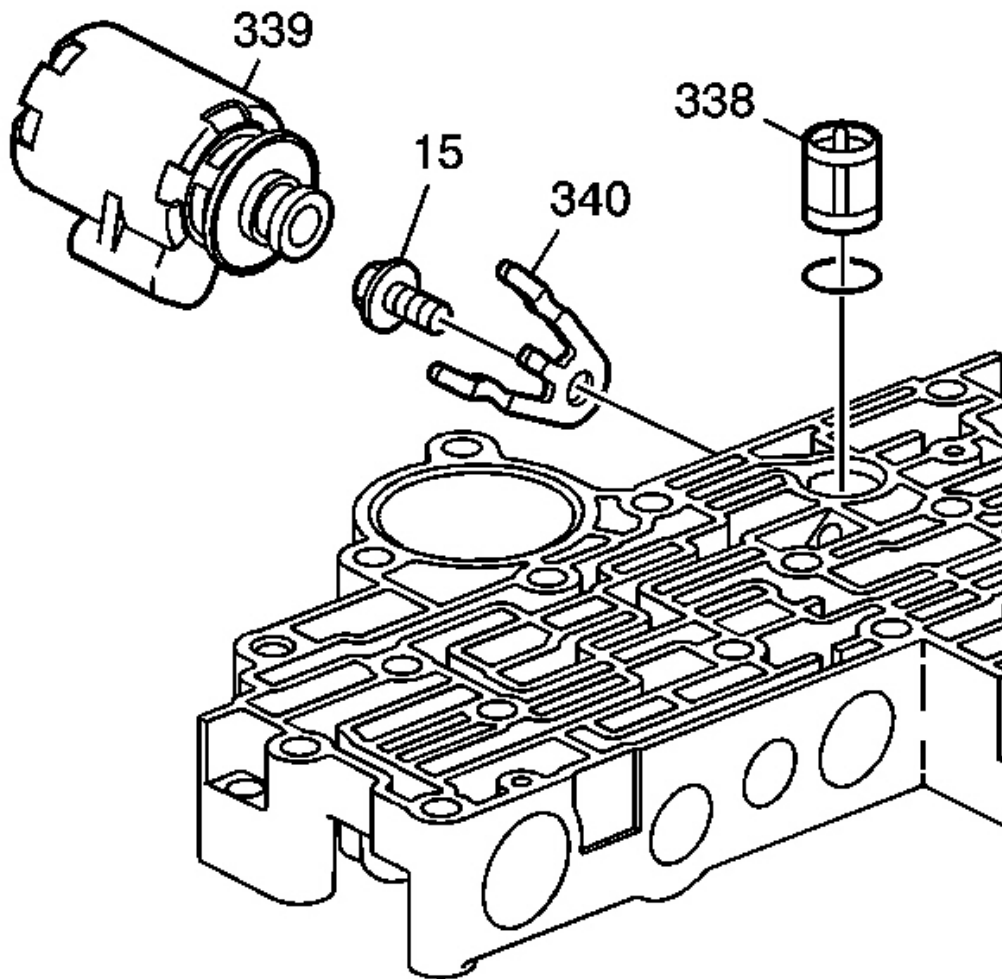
Locating Pressure Control Solenoid Filter, Valve & Seal
